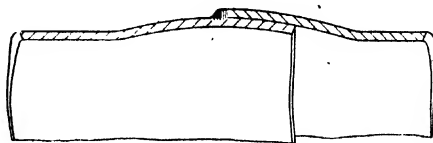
SPHERICAL-WELDED JOINT
